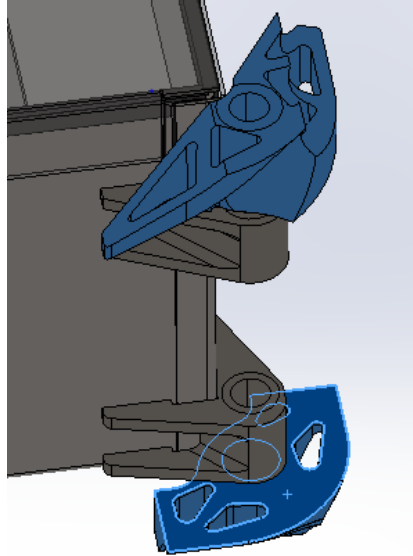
Rear accumulator mounts. Highlighted in blue are the mounts which will attach to the frame tubes.
